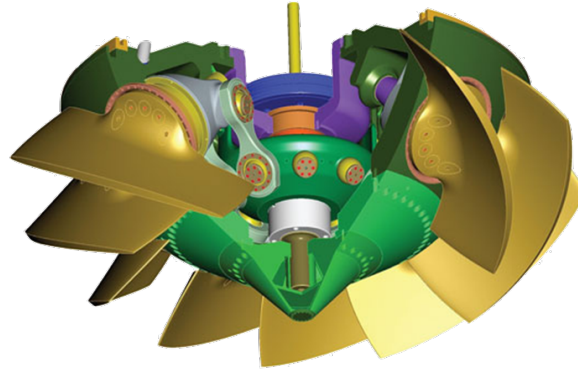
Internal view of Deriaz pump-turbine runner and of its regulating mechanism in the hub [Skotak & Stegner 2014].
